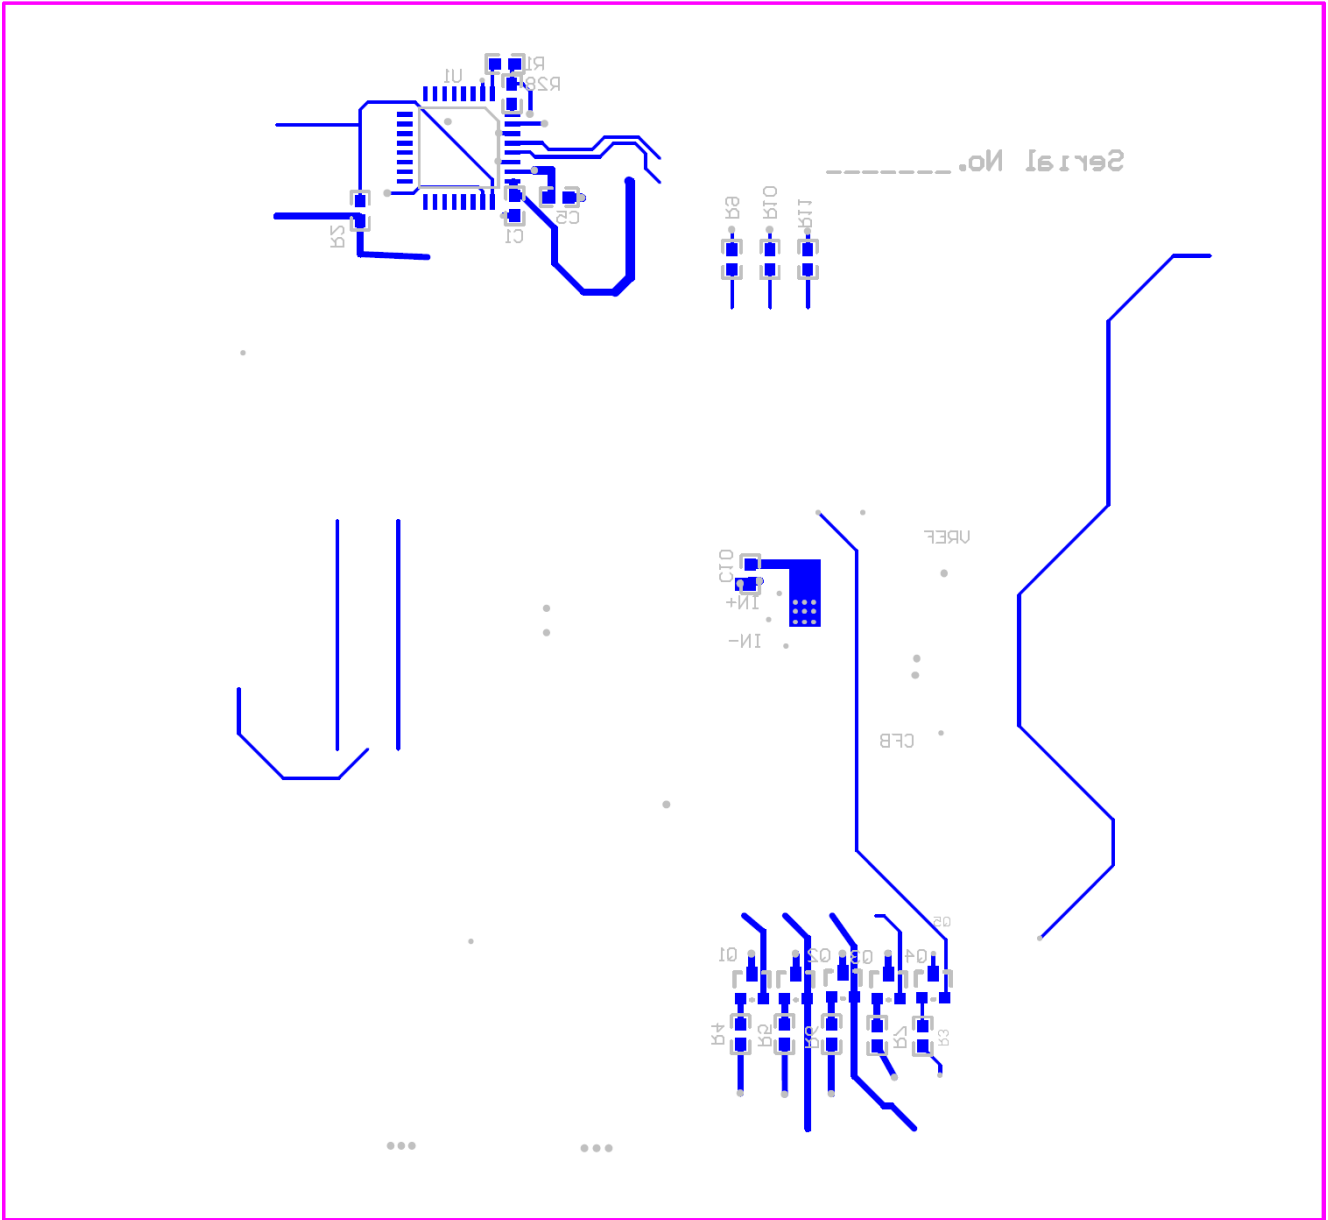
PCB BOTTOM LAYER WITH SILKSCREEN
